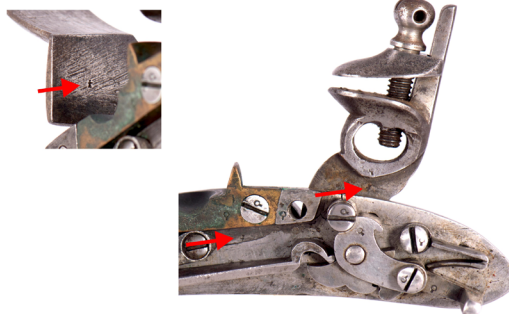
Assembly marks found on an 1811 lock plate used to keep all the fitted parts together.
